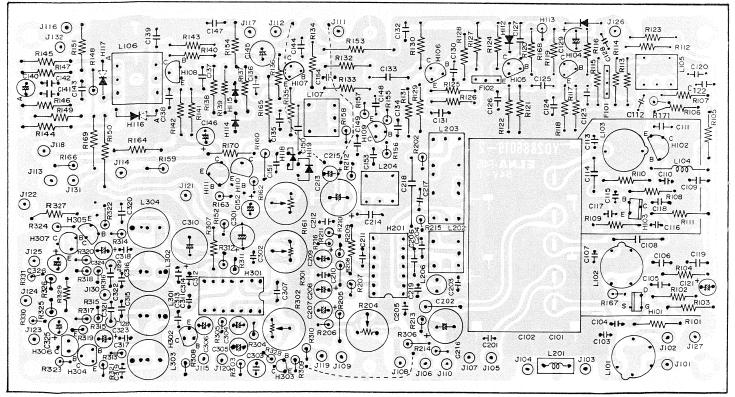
FM/AM Tuner Assembly (P100) Component Locations
